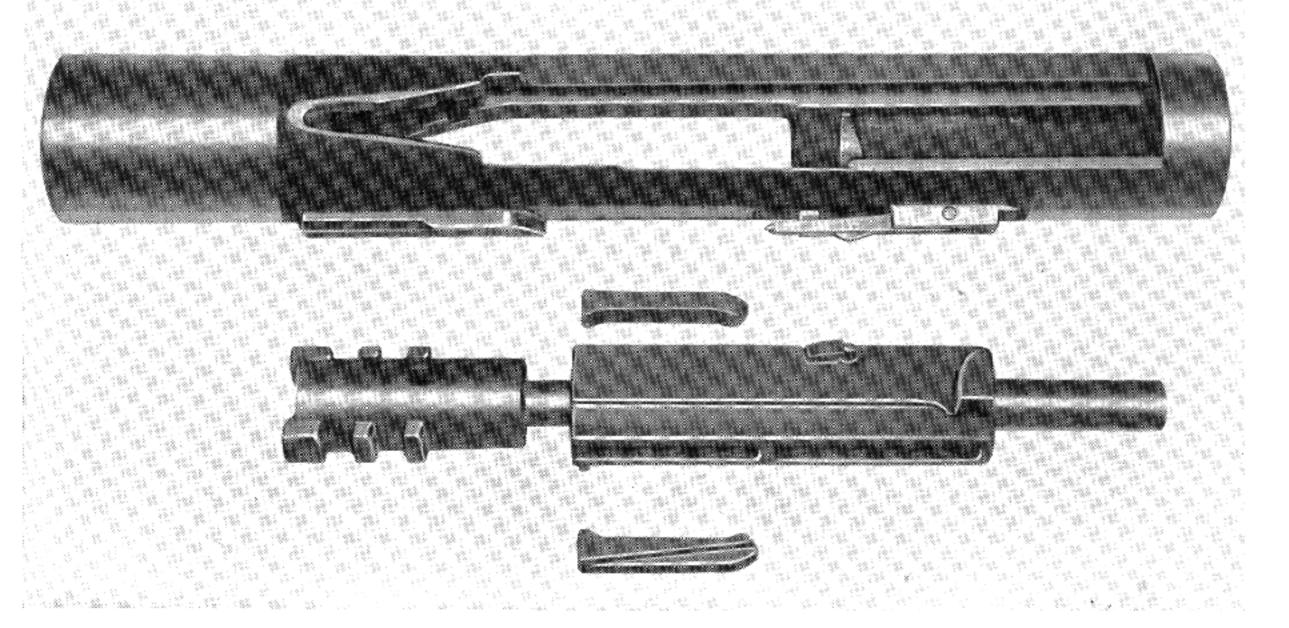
37-mm NS Gun. Barrel extension and bolt.
